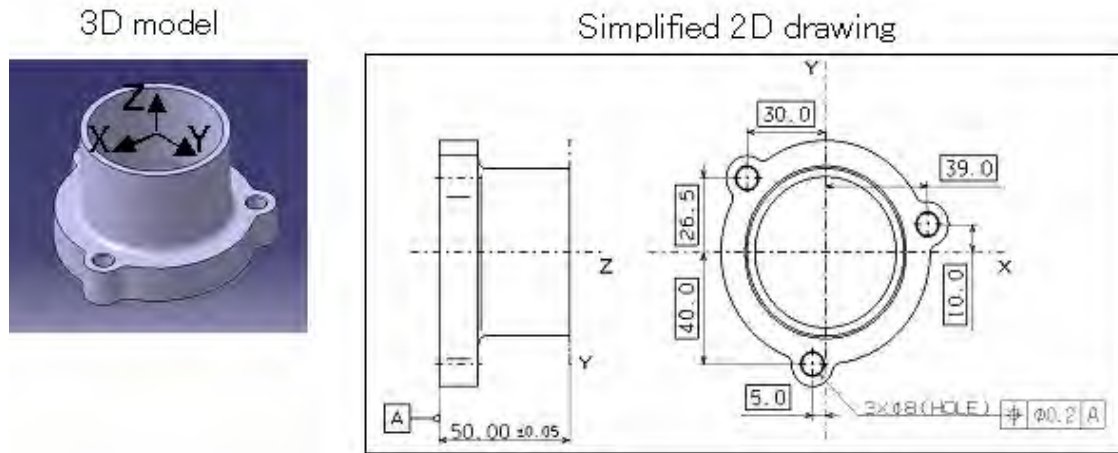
Annotations of dimensional tolerance and geometrical tolerance should be included in displays of simplified 2D drawings (Example)
